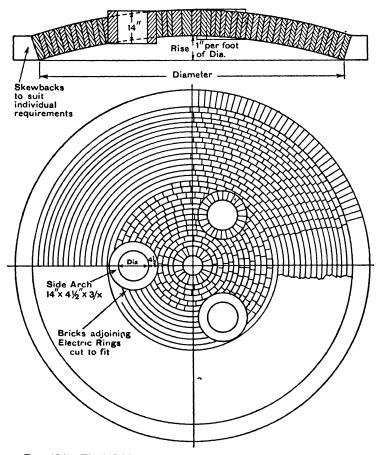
The bricking arrangement of recommended roof design. (By courtesy of the Iron and Steel Institute.)
